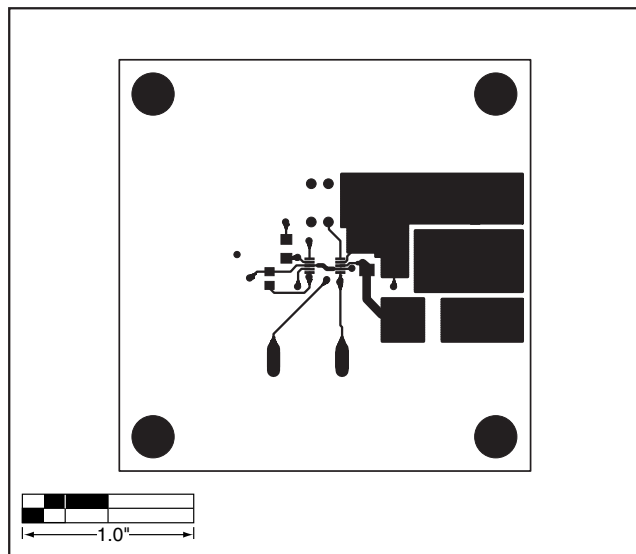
MAX1760 EV Kit PC Board Layout—Component Side
